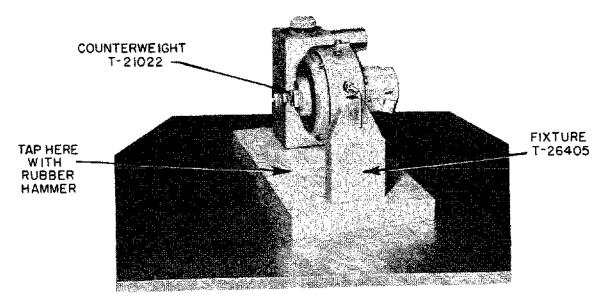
BALANCING THE GYRO HOUSING AND PENDULUM ASSEMBLY, HORIZONTAL POSITION (GYRO-HORIZON WITH CAGING DEVICE)
